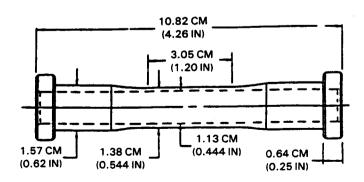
Geometries of Tubular Specimens for Fatigue Testing
